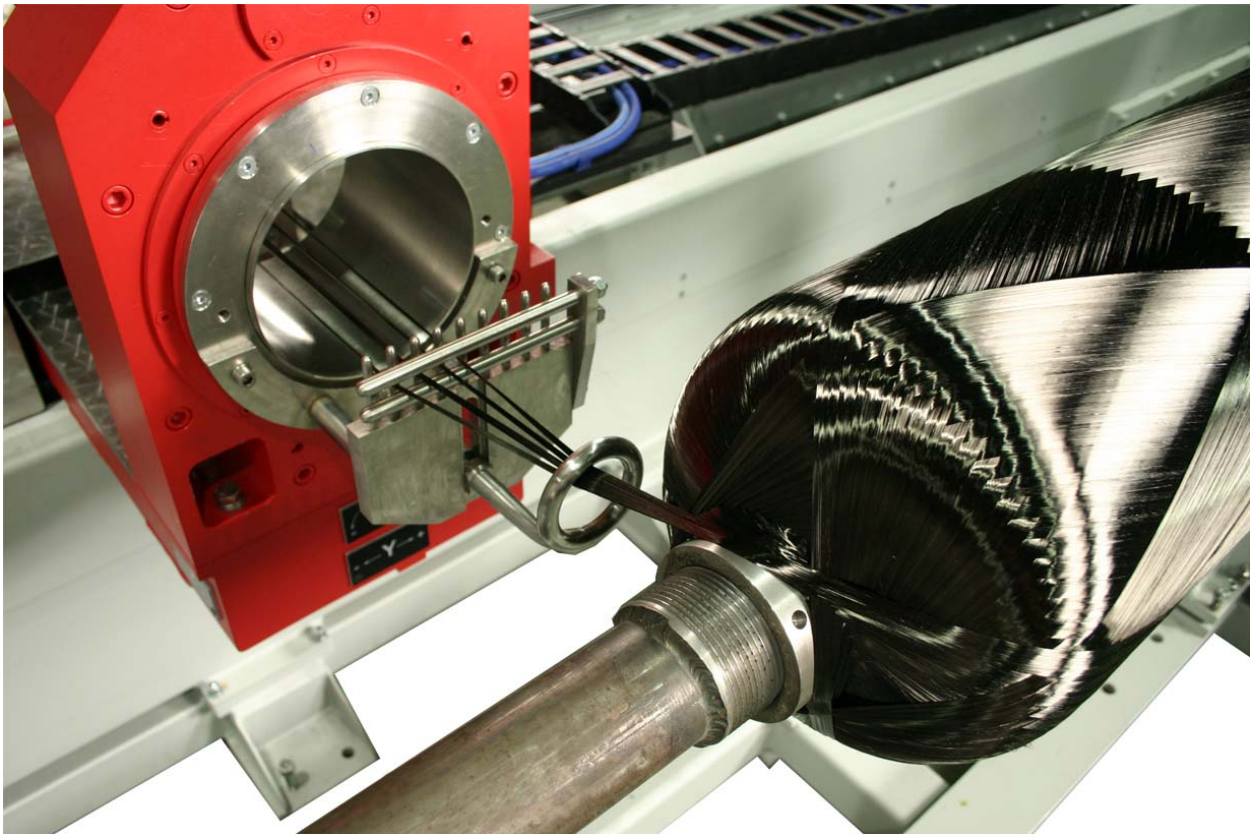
Filament winding machine. Carriage, multi-filament delivery head and mandrel included. Image property of MIKROSAM, control automation robotics
